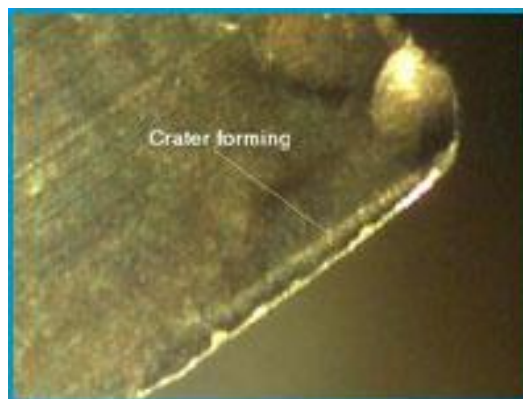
Photograph of Crater wear [Courtesy: www.armg.com, 2011]
